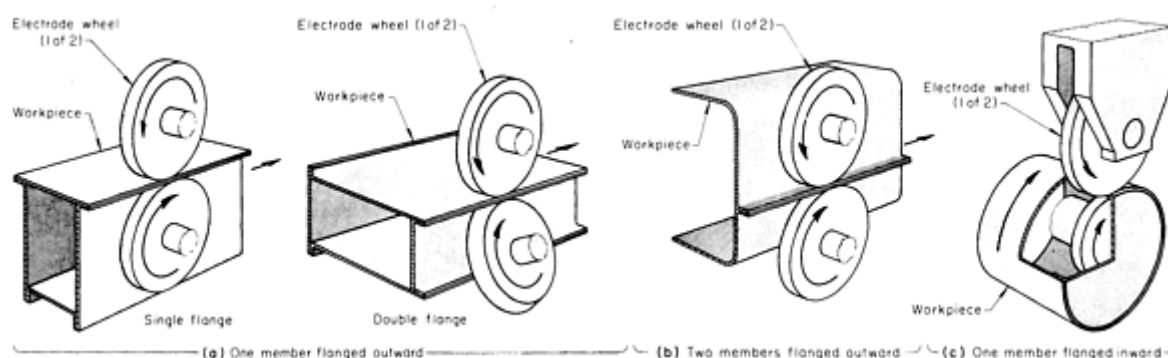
ARRANGEMENT OF ELECTRODE WHEELS RELATIVE TO WORKPIECE FOR SELECTED FLANGE-JOINT LAP SEAM WELDS
